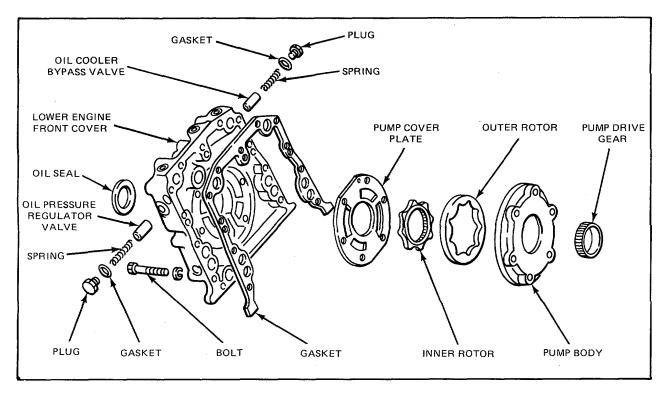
Oil Pump Details and Relative Location of Parts (Current)
